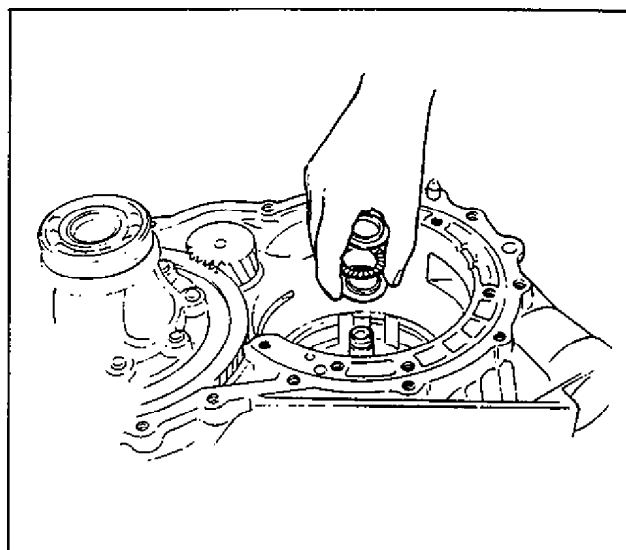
B-194 Installing Rear Planetary Ring Gear Bearing
